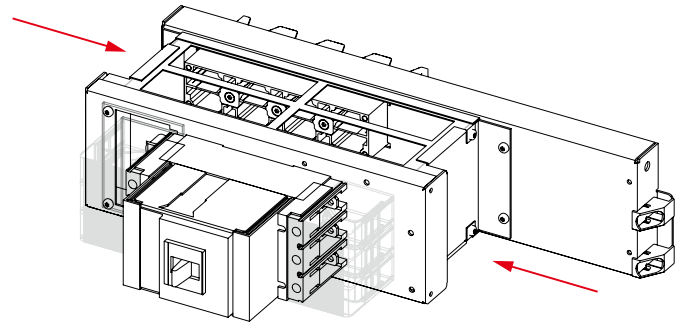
Ergonomic design for improve module handling. The module support plate is designed with handles on both sides.
